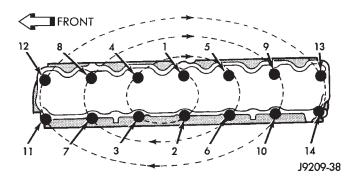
Cylinder Head Cover Gasket Locator Pins at #8 & #9
